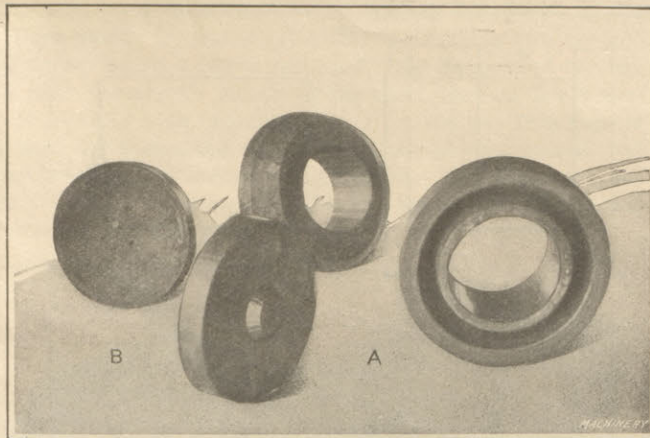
Shrapnel Shell Head and Diaphragm produced in a Power Forging Machine
